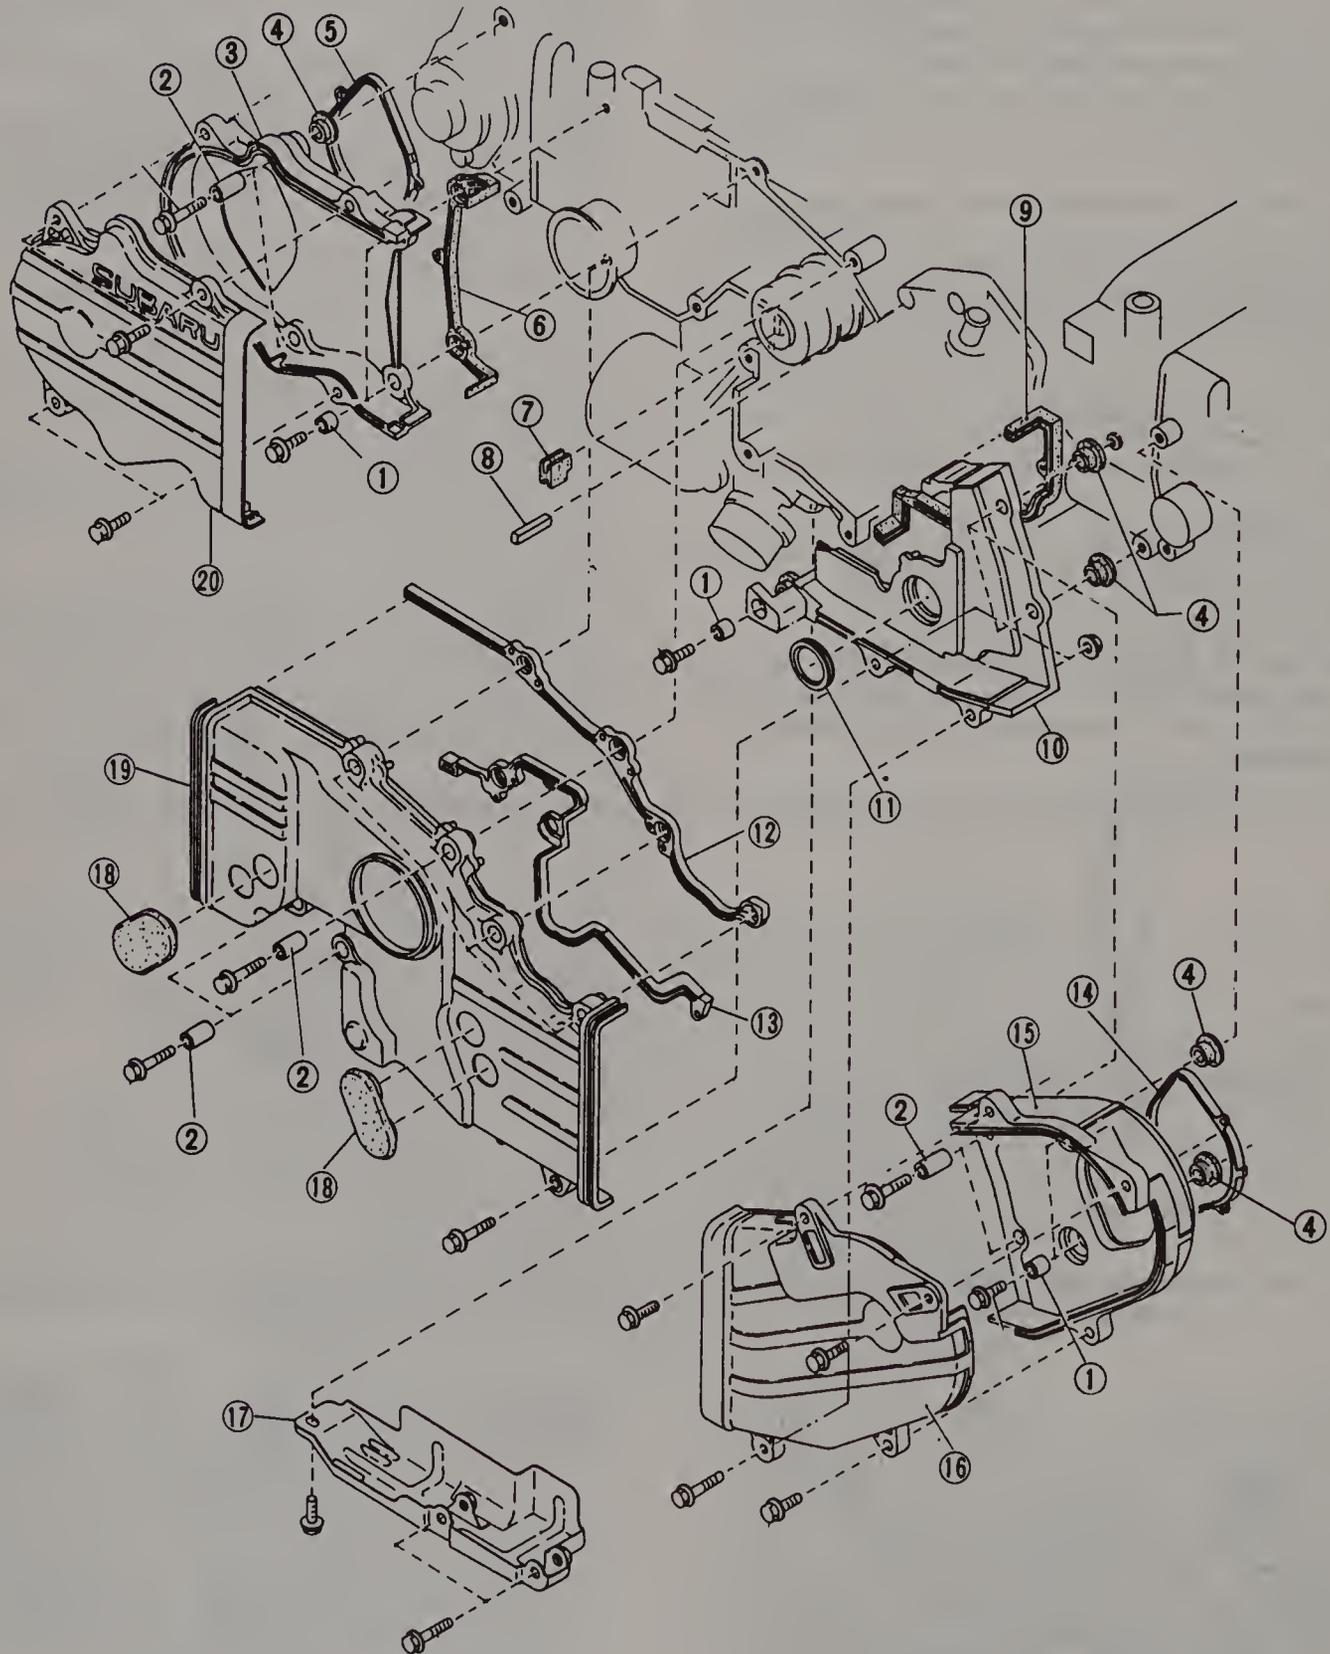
Timing belt covers — exploded view (Sec 5)
